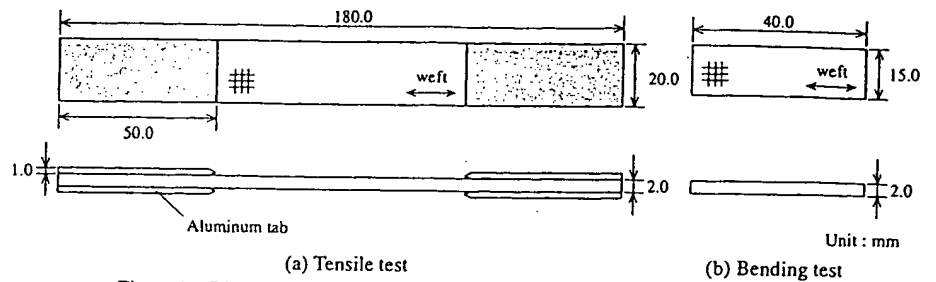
Dimension of specimens for uni-axial tensile and 3-point bending tests
